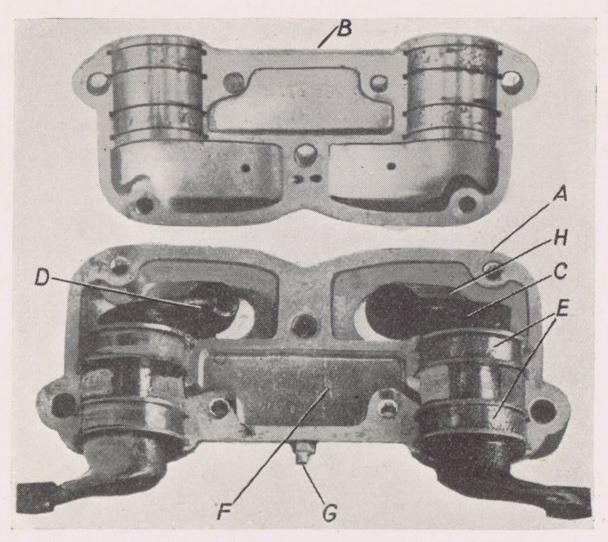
The O.H.V. Rocker Box with Cover Removed
